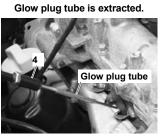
Extracting the glow plug tube using slide hammer puller (accessory).
